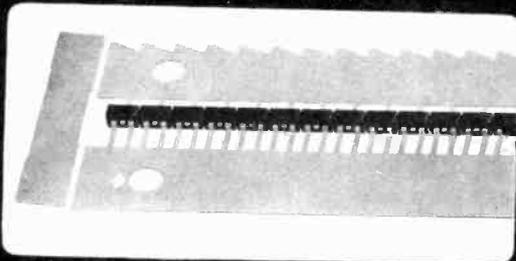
The Micro-E frame is formed and trimmed and the moulded dice separated by cutting
